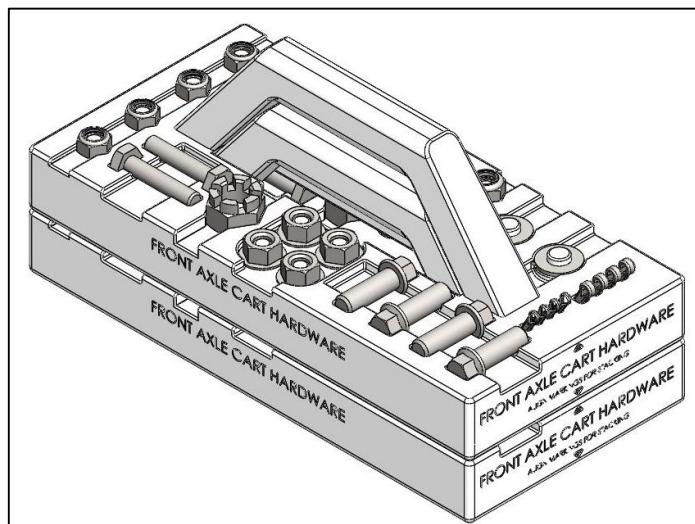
Fully assembled and stacked front axle cart hardware fixture [72].
